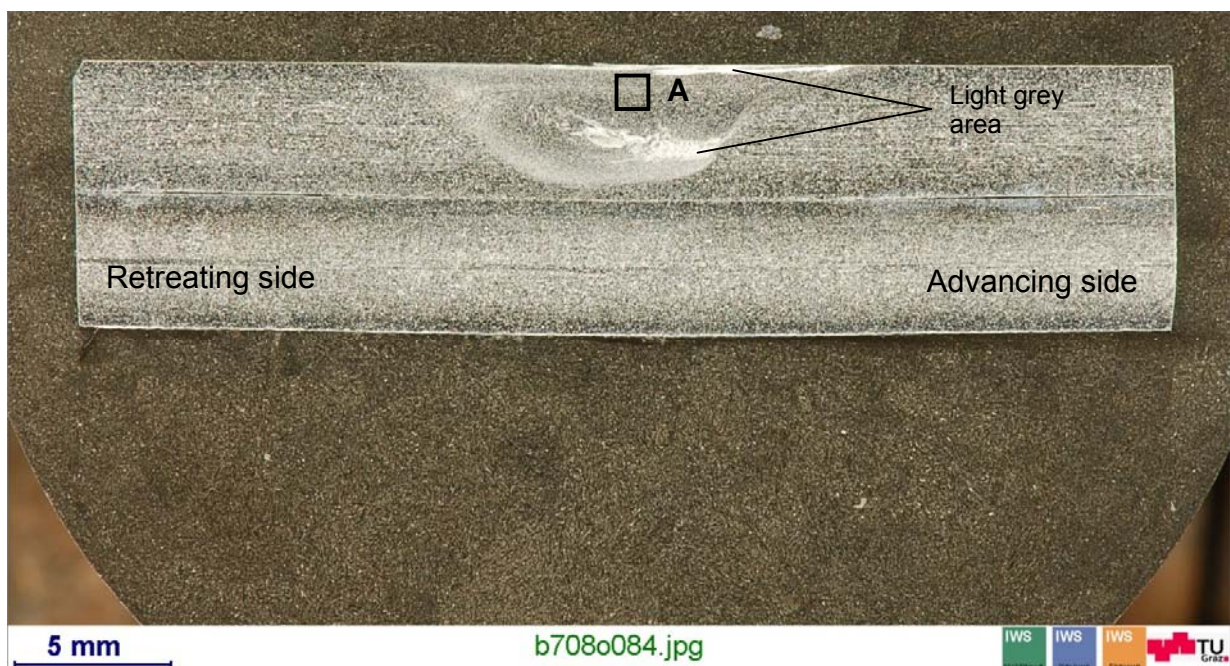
Cross section macrograph of bead on plate welded steel DIN 1.4301 using W25Re tool material
